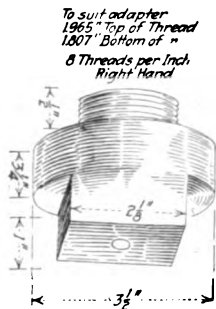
CHUCK FOR ADAPTER END OF SHELL
